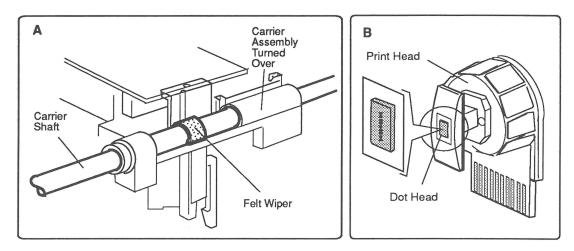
Lubricating the Carrier Shaft and Cleaning the Dot Head
